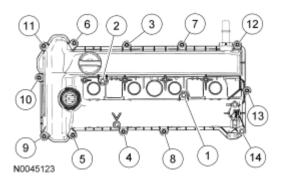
Identifying Valve Cover Bolts Tightening Sequence Courtesy of FORD MOTOR CO.
